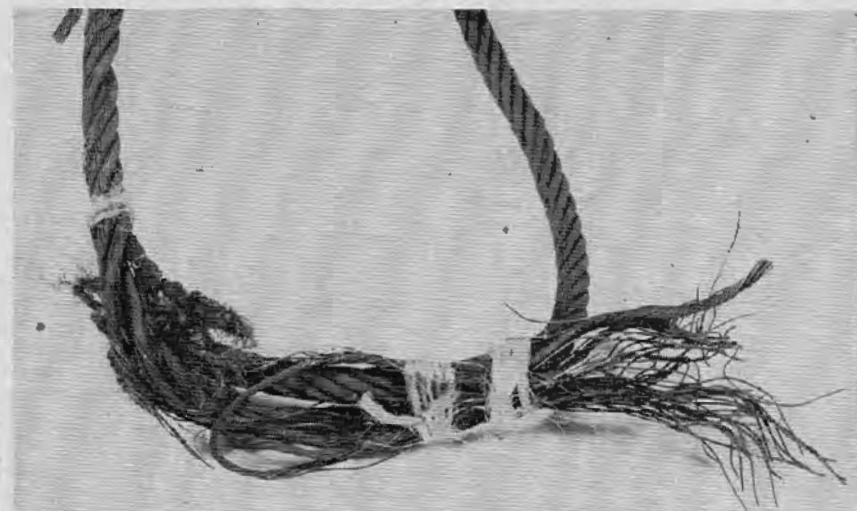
Section of $\frac{3}{4}$ -inch 6-19 plow steel toppinglift which parted in boom test.
